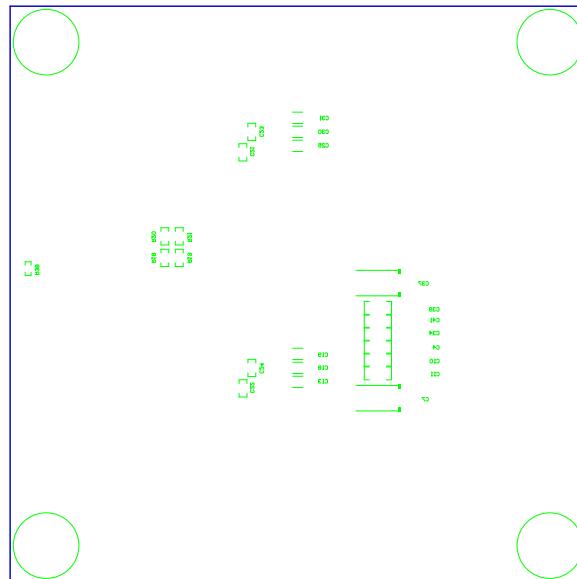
TPS543C20EVM-869 Bottom Overlay Layer (Top View)
